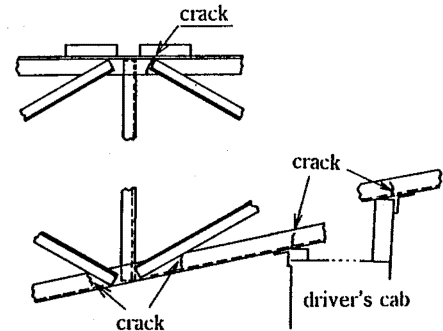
Cracks at truss girder of an overhead travelling crane.
